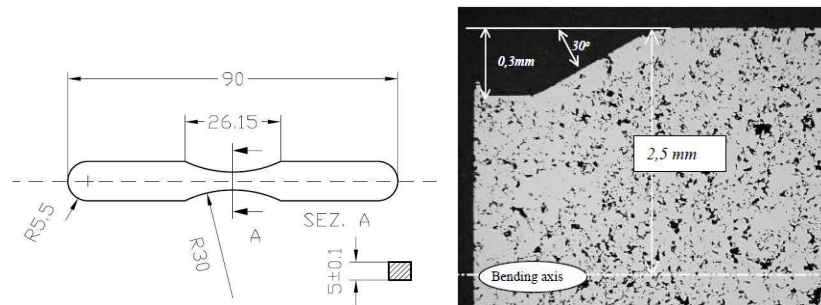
Modified ISO 3928 test specimen with chamfered edges [49]
